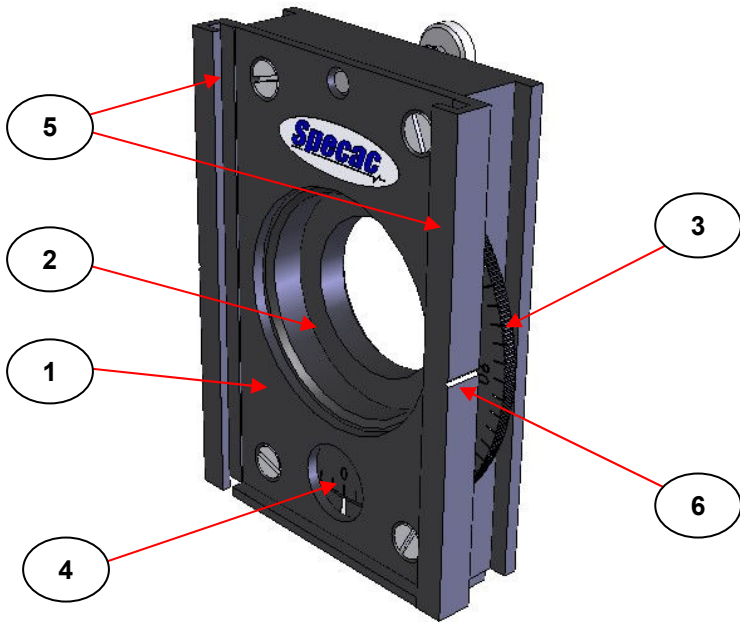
Front Side View of Rotator 3" x 2" Slide Mount P/N GS12500
